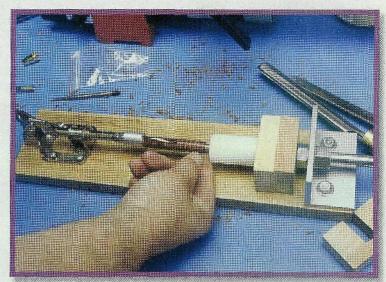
A pen press can be a good tool to help in getting a proper fit.
